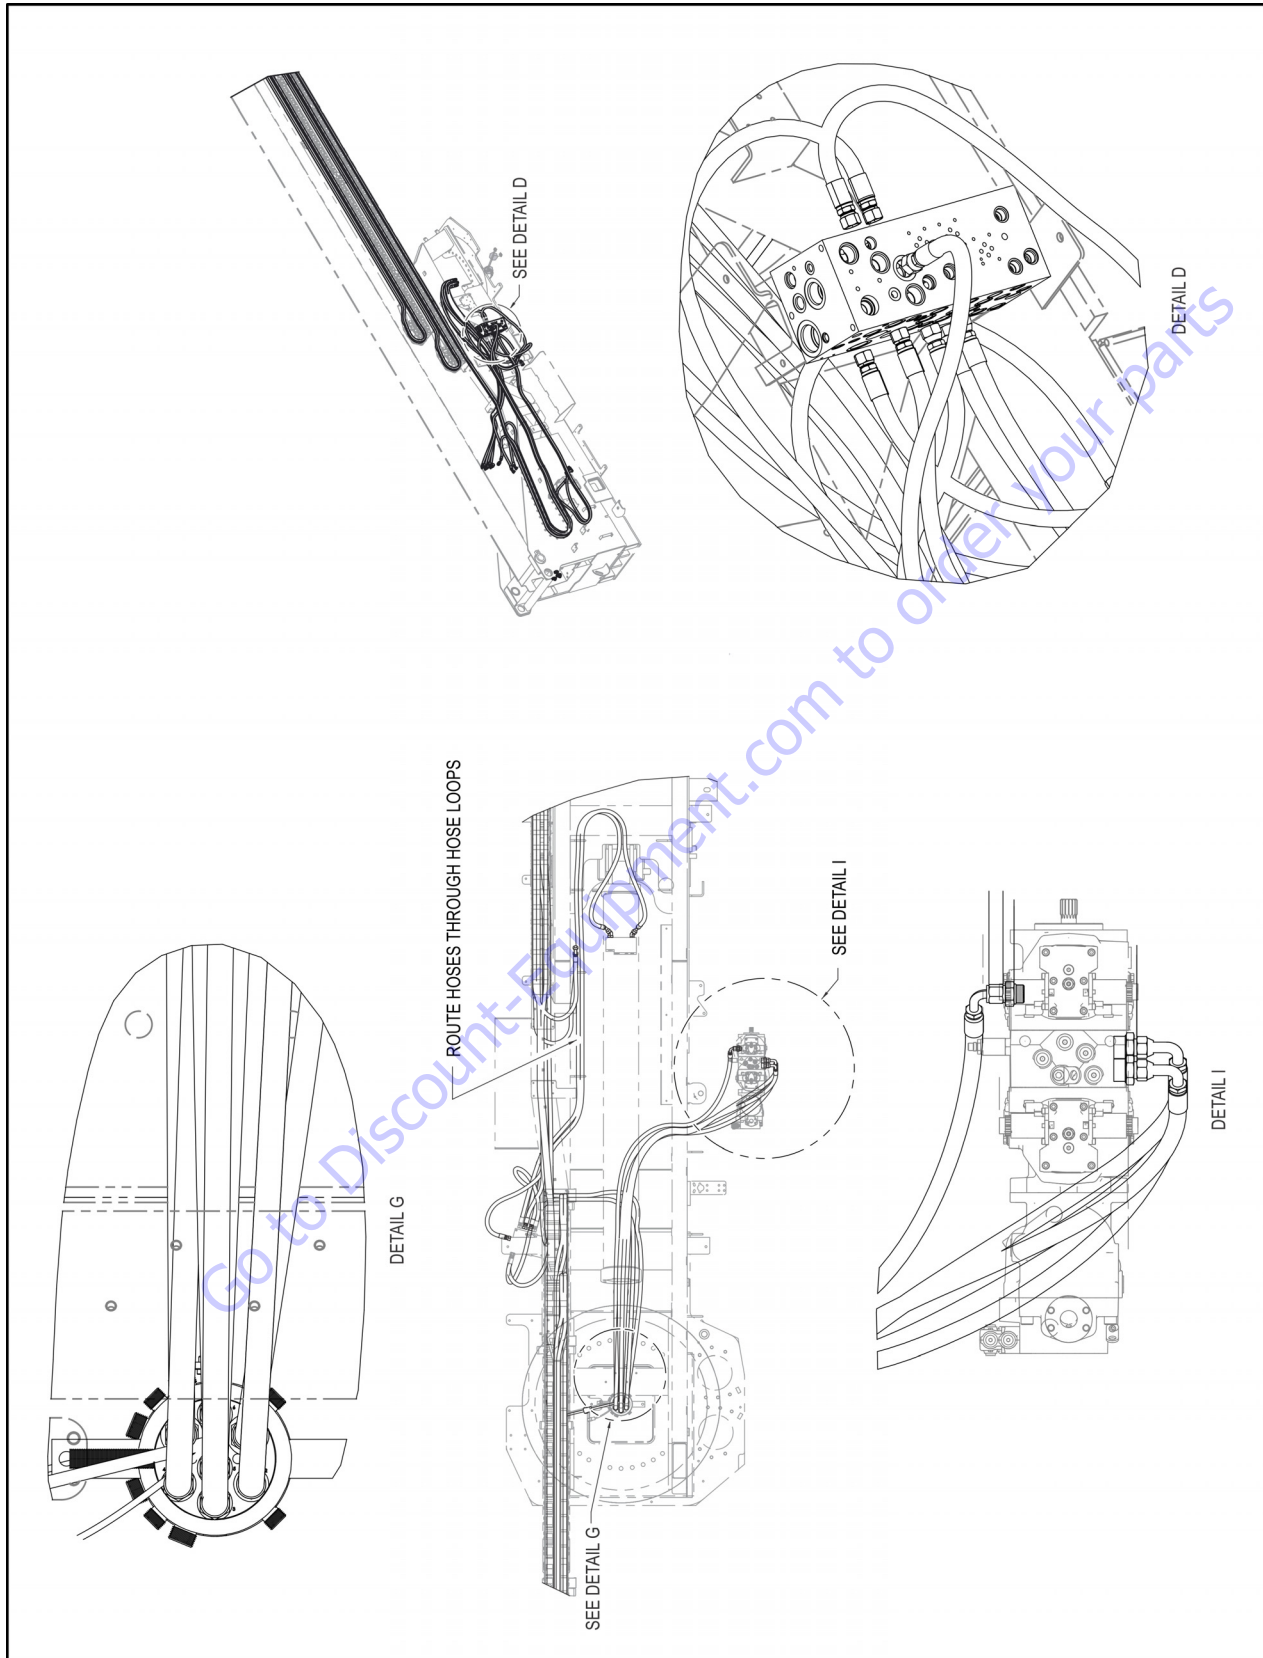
Hydraulic Hose Installation - Sheet 2 of 8
